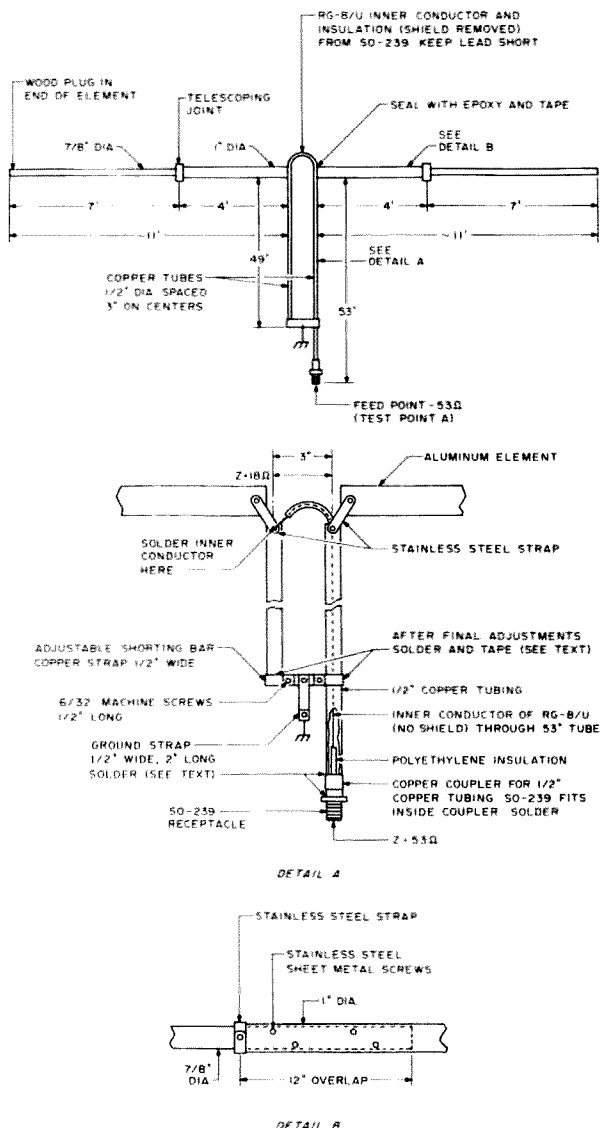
LB-2 array for 15 meters. Use same matching section for 10 meters but see Table 1 for shorting bar position. General dimensions of driven element are shown. Detail A shows matching section. Detail B shows method for joining element sections.
